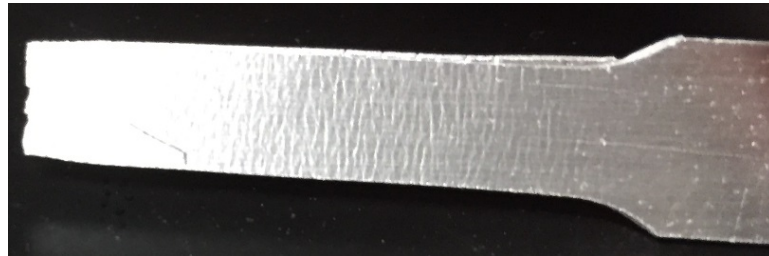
Al 6061-H18 welded onto 5052 base-layer post tensile test. Many small surface cracks are visible.
